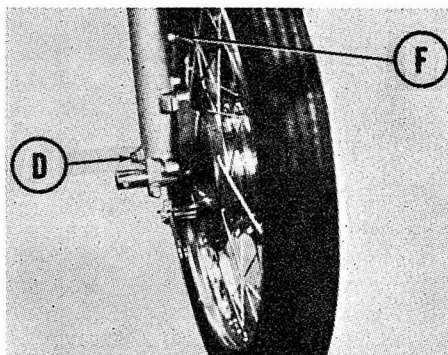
Oil in front forks is drained at screw (D). Oil should be maintained at level of filler screw hole (F).
